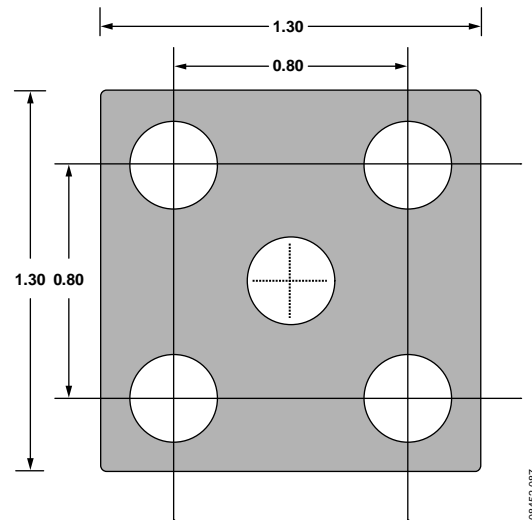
Recommended PCB Thermal Attach Pad Dimensions (mm)
